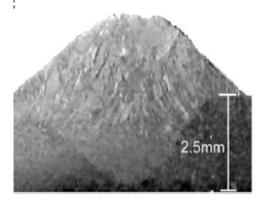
Cross-section of weld pool for sample S3 (82% Ar + 18%CO₂) [2]
